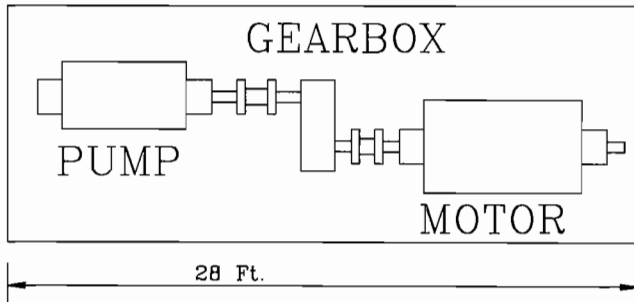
Schematic Showing Pump/Gearbox/Motor Package.
